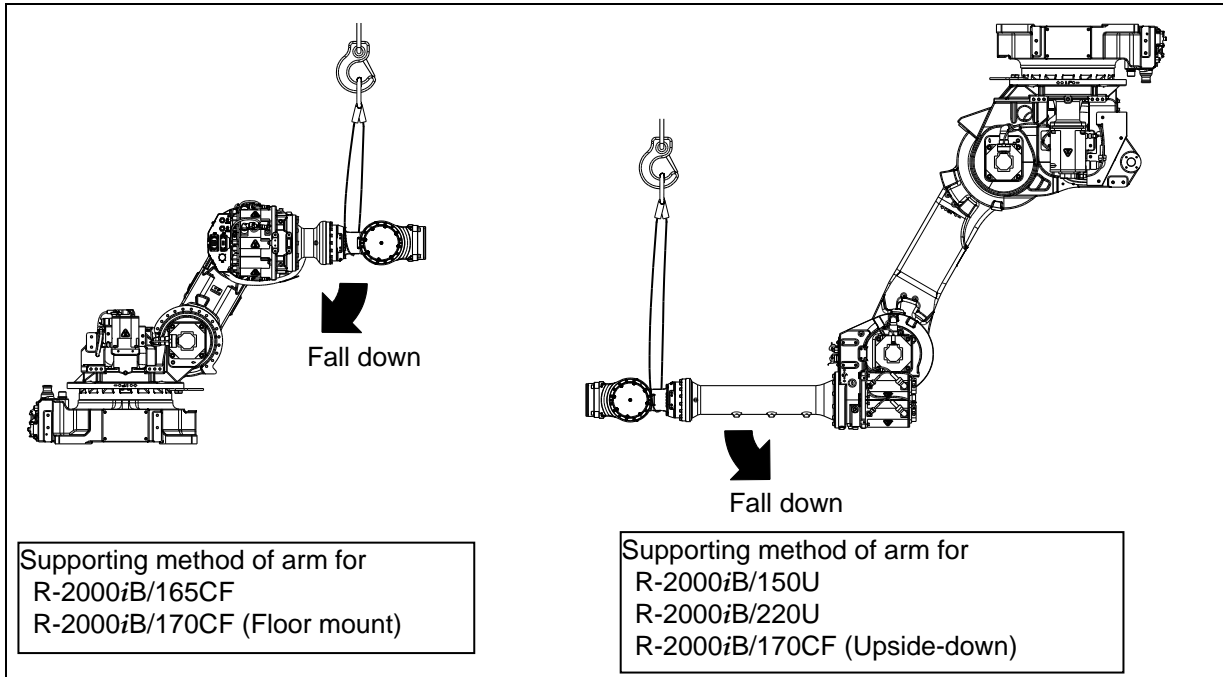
(e) Releasing J2 and J3 motor brake and measures (R-2000iB/170CF/150U/220U/165CF)
